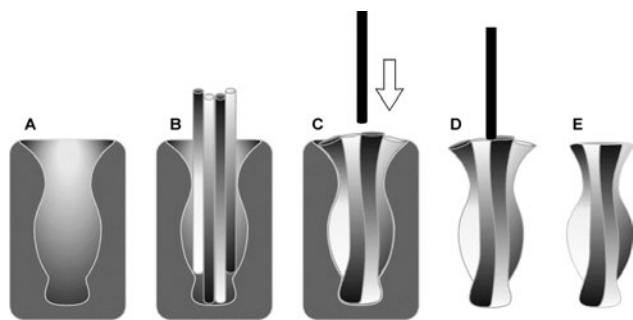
Fuse-casting of glass objects: (A) production of black mold; (B) glass pieces added, heated to fuse and fill mold; (C) metal rod inserted; (D) mold removed; (E) piece ground and polished to finish [adapted from reference 42 with permission from Springer Nature].
